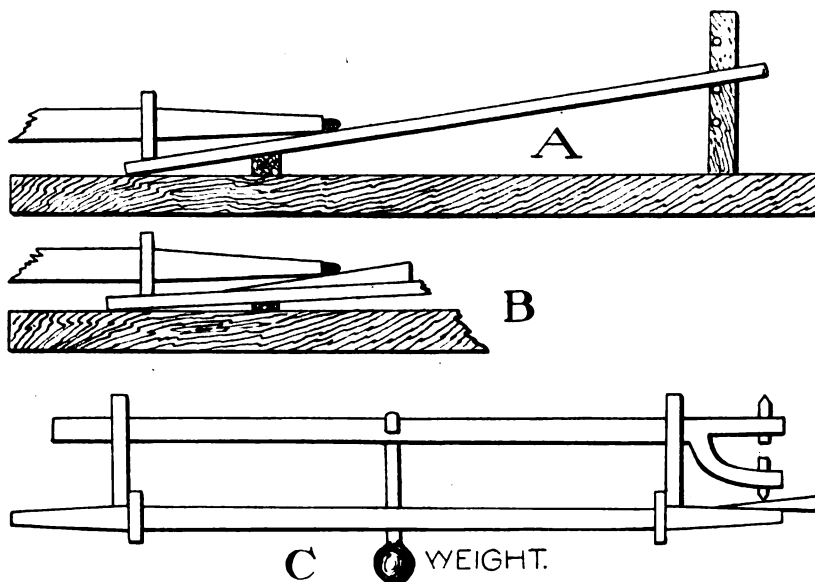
GAUGE FOR SETTING AXLES AND METHOD OF USING.
